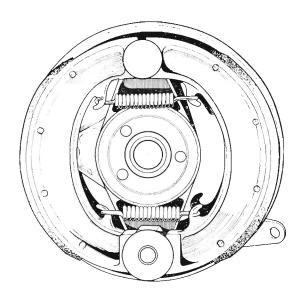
Correct assembly of brake shoes onto front anchor plate.
